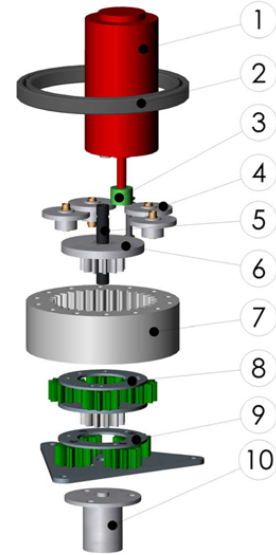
Explosion view of the DC-motor-gearbox, pinions are made from plastic with metric modules (1) FH2342 DC-motor, to be used in the outer half-spheres (2) thin-section ball bearing (3) first pinion, module $m = 0.5$ (4) spur gear set $m = 0.5$ (5) hollow axis to include 6 wires from the slip ring (6) altering pinion module from $m = 0.5$ to $m = 1.0$ (7) internal gear $n = 32$ teeth, 3D-printed ABS plastic (8) first stage planetary gear: $m = 1.0$, $n_{sun} = 12$, $n_{planets} = 10$, $n_{internal} = 32$ (9) second stage planetary gear (10) drum-style slip ring.
